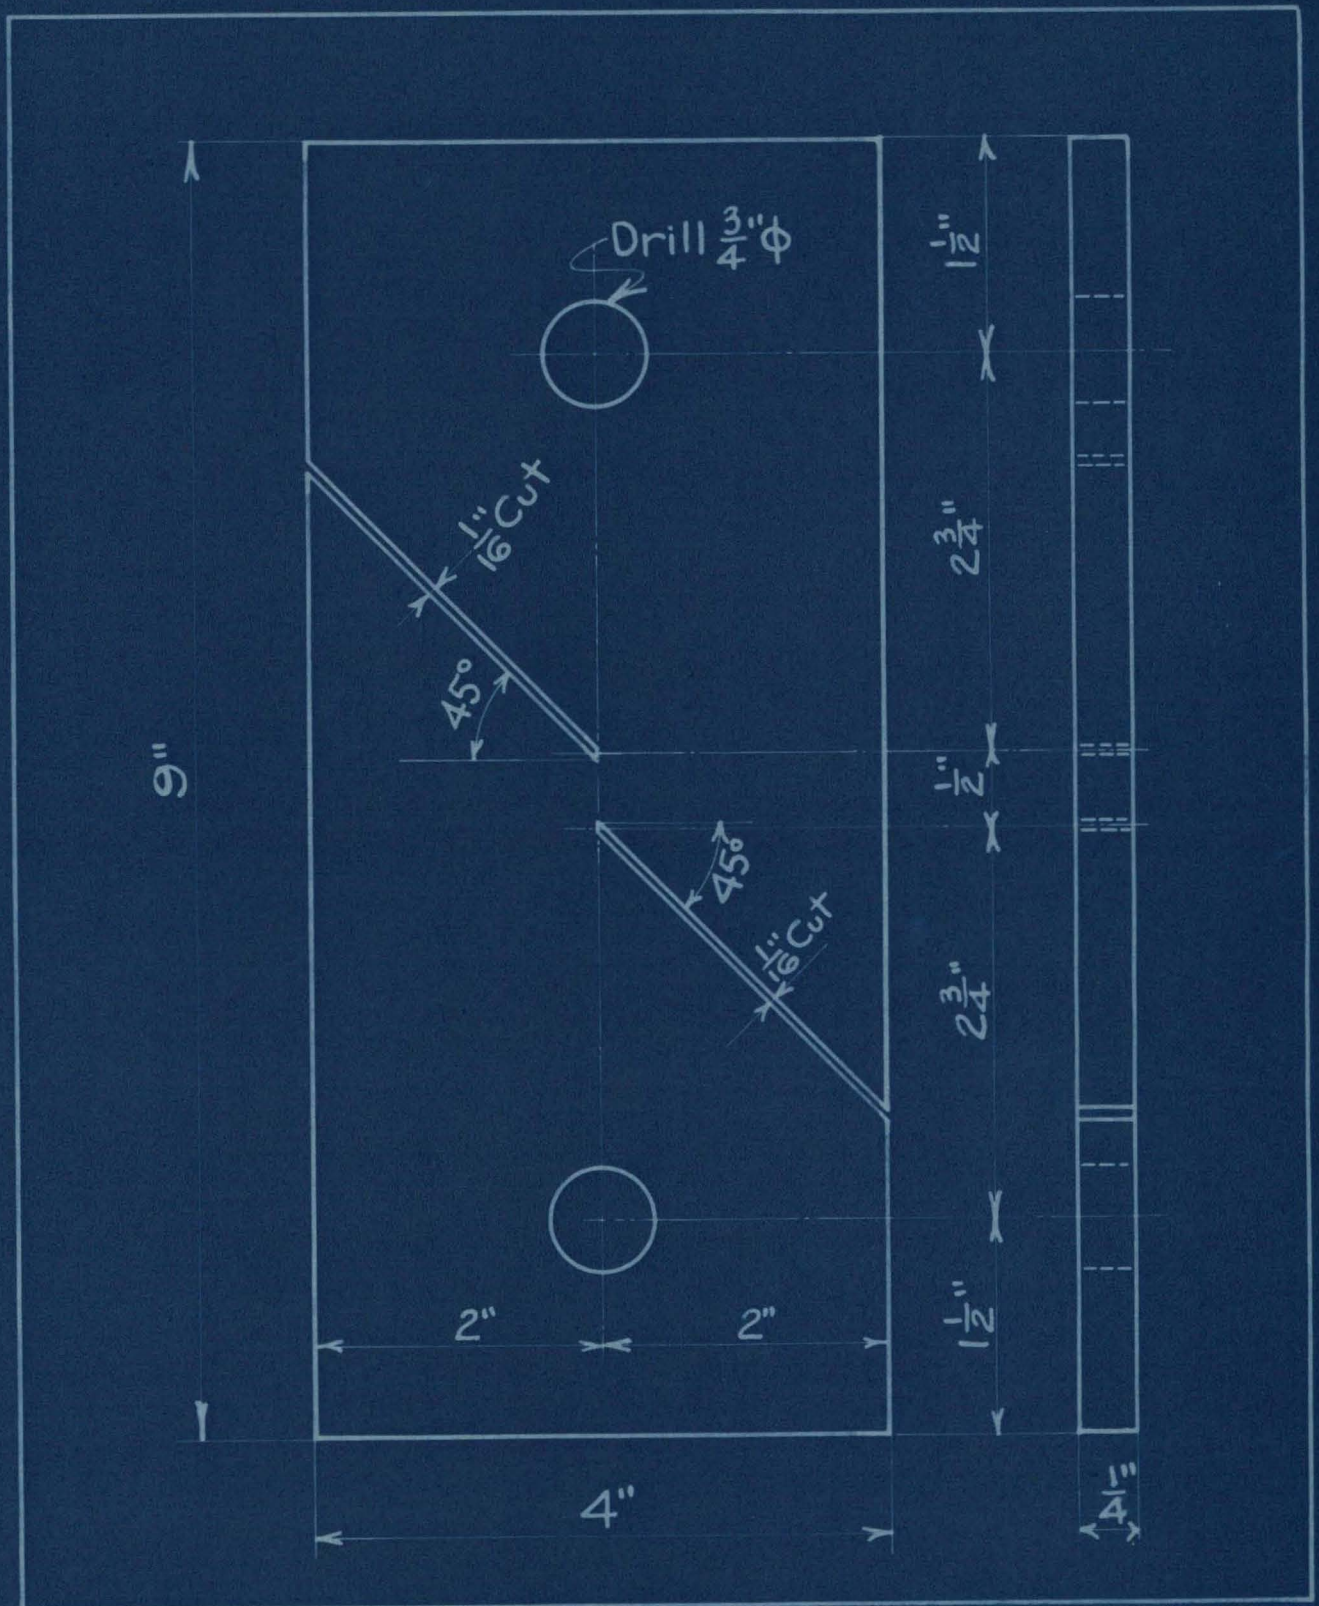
TYPICAL SLOTTED PLATE SPECIMEN
